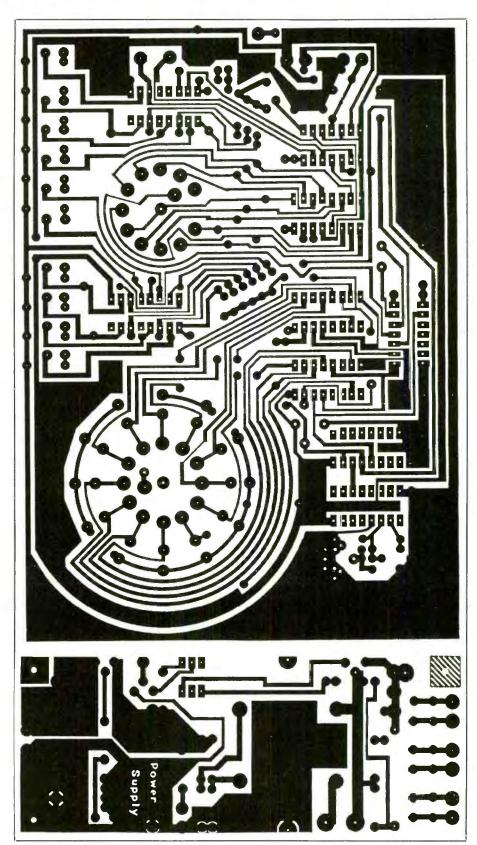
Actual-size etching and drilling guides for the counter and power-supply/controller printed-circuit boards.
